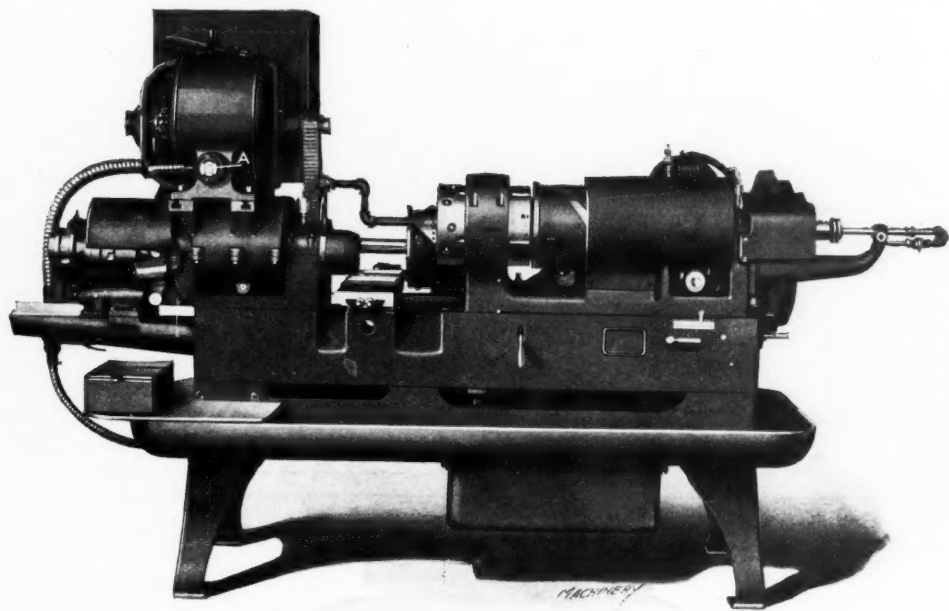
Front View of Cleveland Full Automatic Motor-driven Machine
